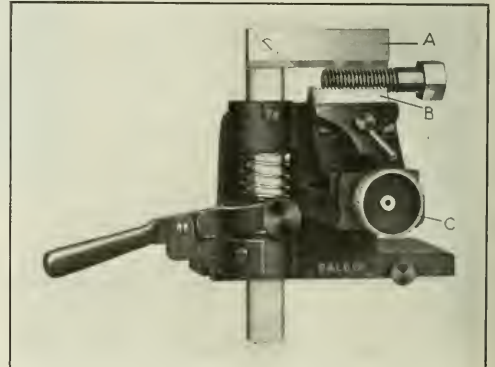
Universal Screw-holder for Use in Inspecting Machine Screws
